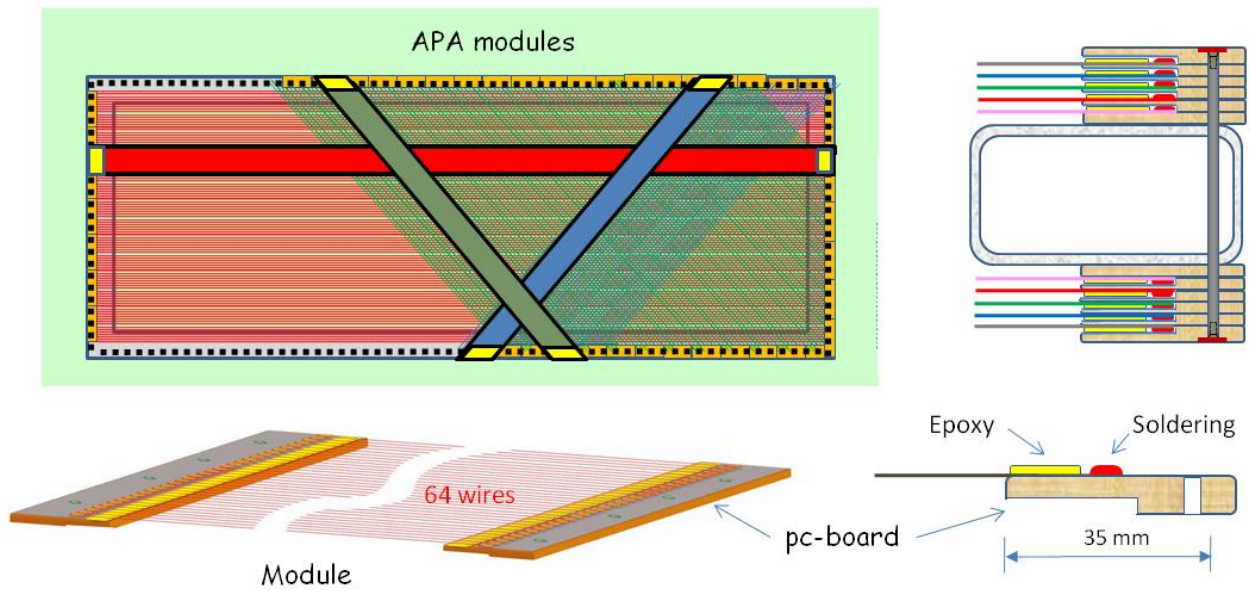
Concept of the alternative APA wiring scheme using pre-assembled wire modules
